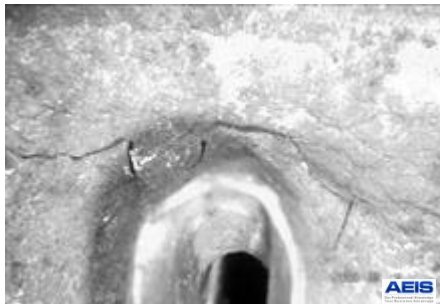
Cracks in the solder at header plate surface in leaking radiator
